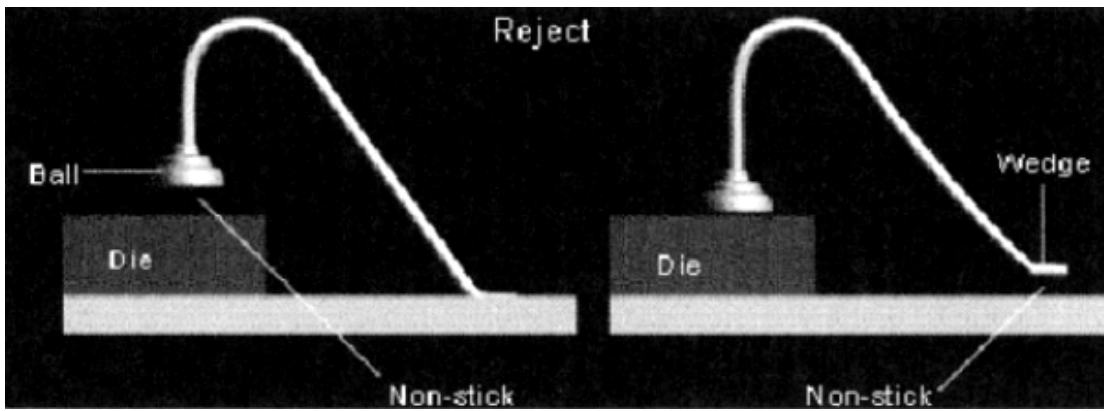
Ball lift and wedge (weld) lift failure
